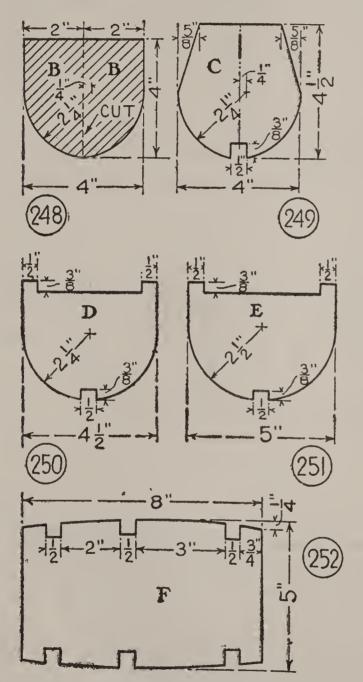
Cross-Section of Bow Blocks. Fig. 249.—Stern-Piece Pattern. Figs. 250 and 251.—Bulkhead Patterns. Fig. 252.—Deck-Piece Pattern.
